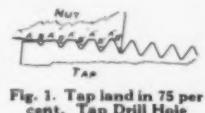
Tap land in 75 per cent. Tap Drill Hole
